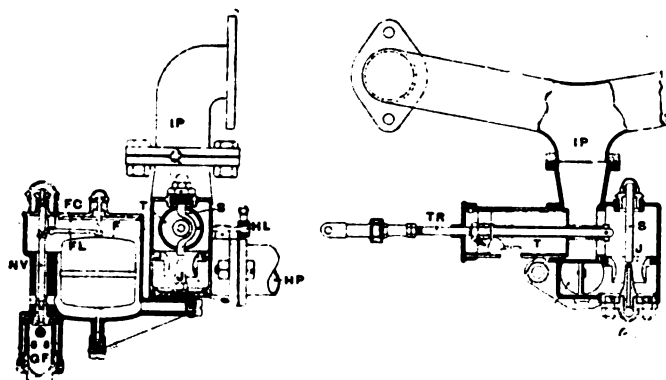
Sectional Views of the Lorraine-Dietrich Carburettor.
